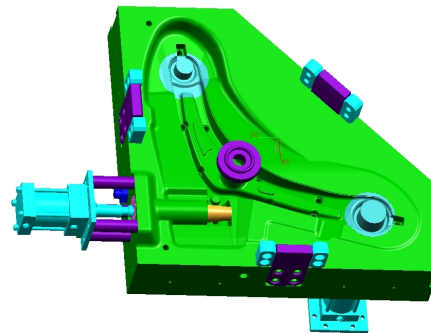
Upper mold half showing retractable cores. The two cored holes shown in blue retract as well
